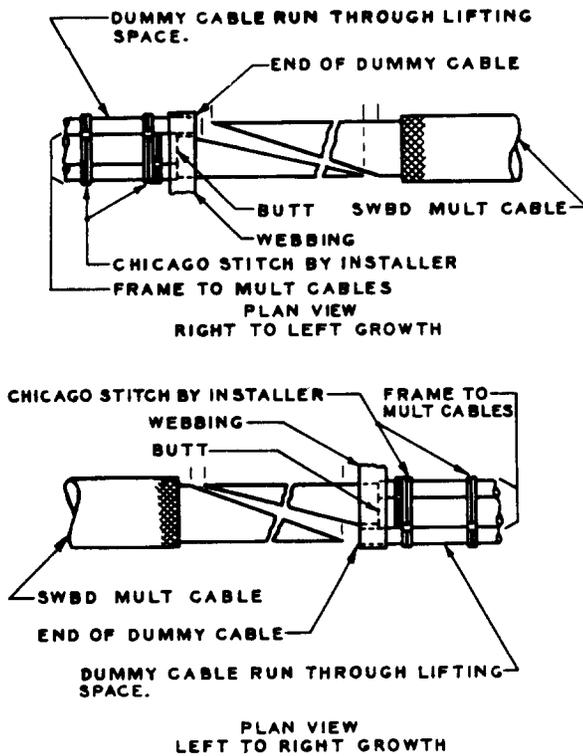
Method of Adding Dummy Cables To Frame-to-Multiple Cables
